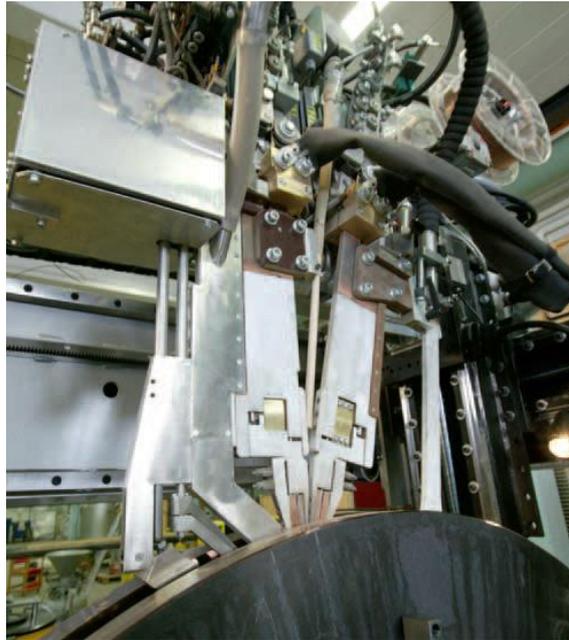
Narrow Gap Welding head [26]
